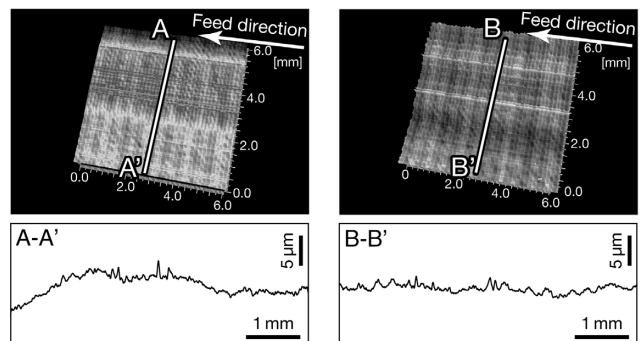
Surface topography of Al and Mg welding material machined using (a) noncoated, and (b) DLC coated tools in milling experiment at the cutting speed of 60 m/min, measured by a coherence scanning interferometer; The upper and lower sides of the material are Al and Mg alloys, respectively.
